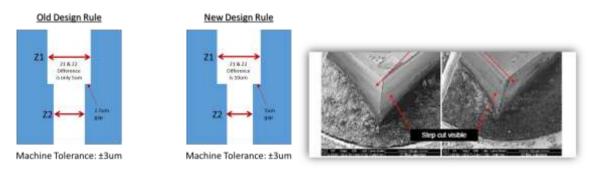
Linear Tolerance Analysis and Step Cut Visibility
